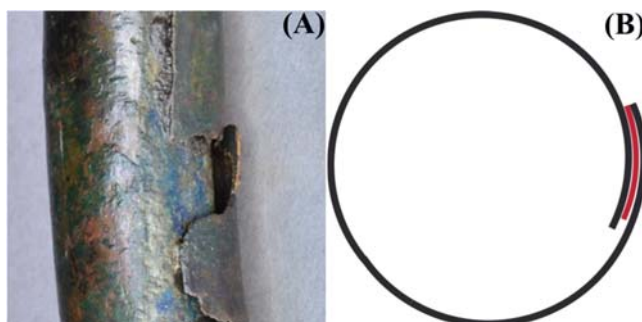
Detail of the soldering of the tube (A) and its graphical representation (B).
